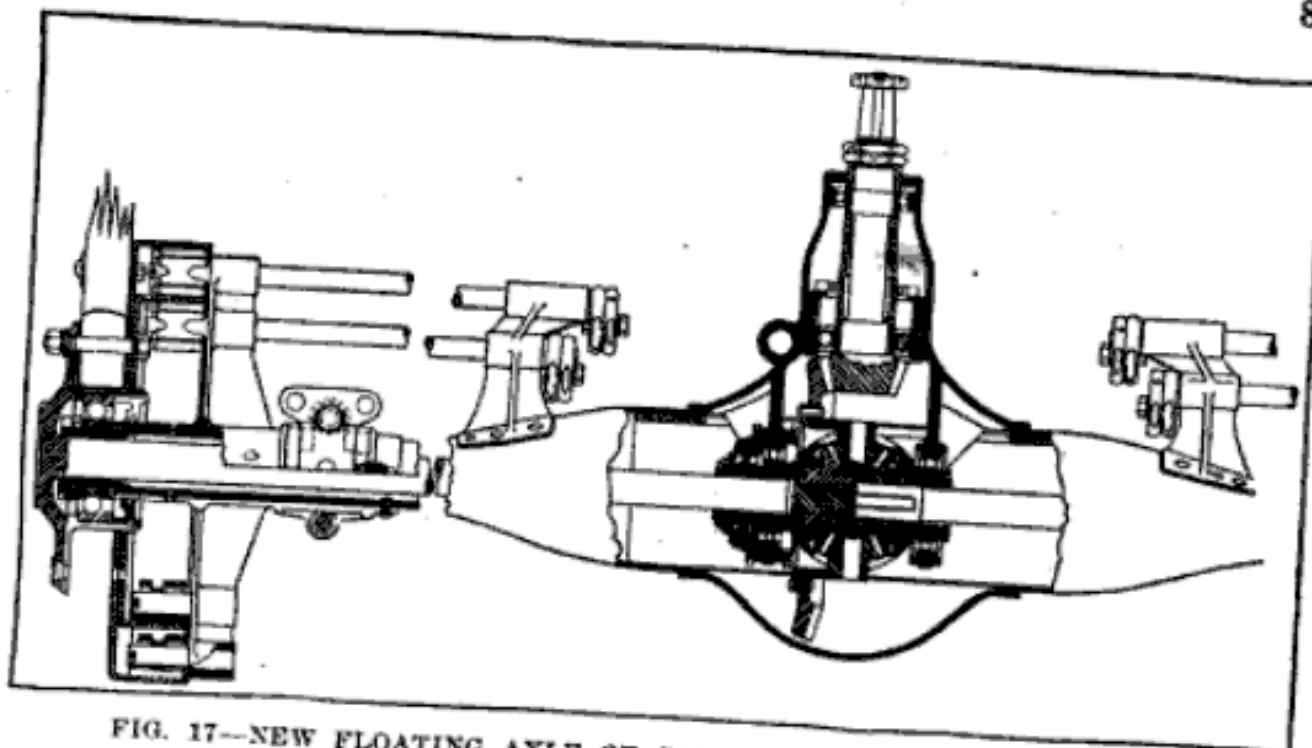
NEW FLOATING AXLE OF SALISBURY WHEEL AND MFG. CO.
